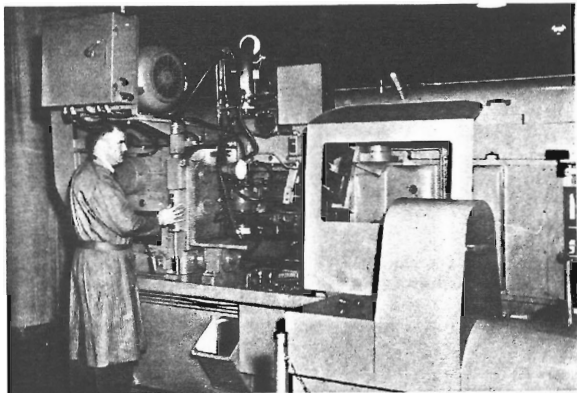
Combined hardening and machining of automobile trunnion cups. (*Mechanics Universal Joint Corp.*)
